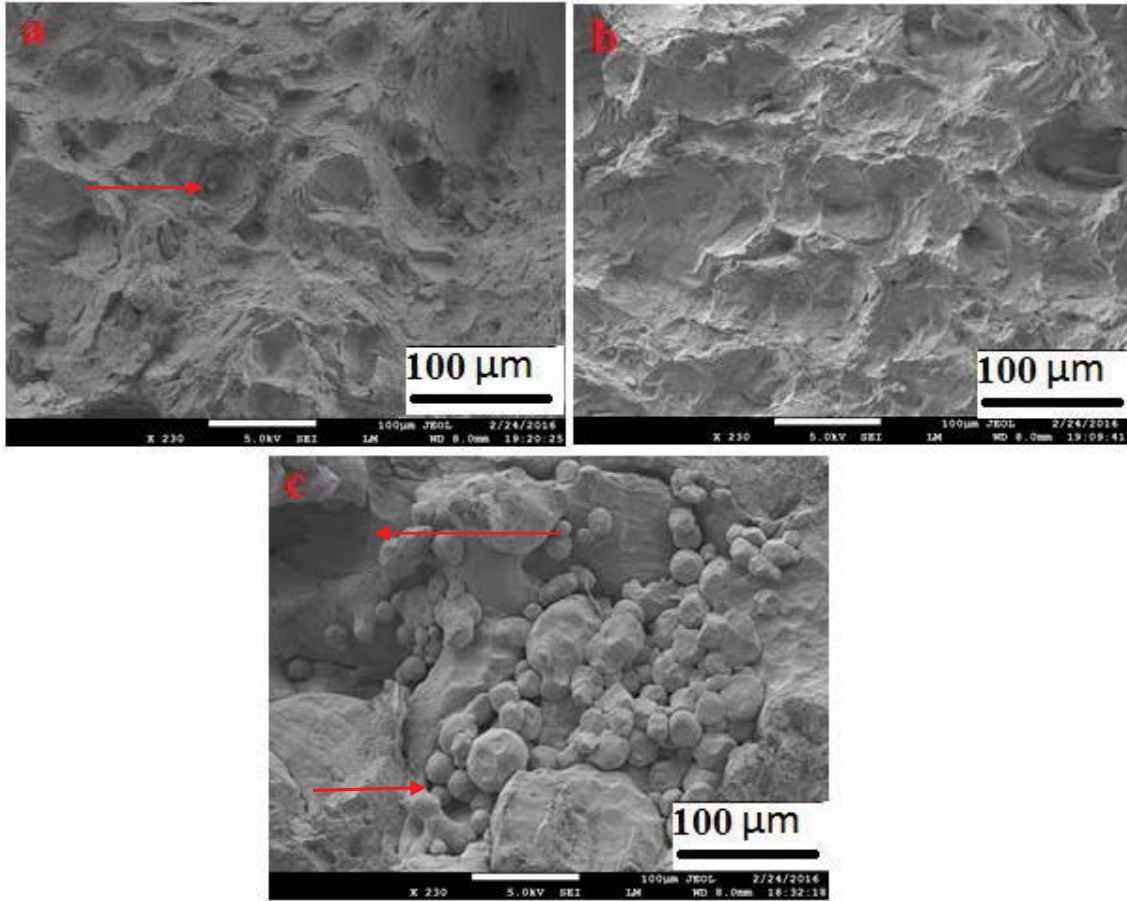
(a) Secondary backscatter images at 230x of second parameter Charpy fracture surfaces of XY, (b) ZX, and (c) XZ.
